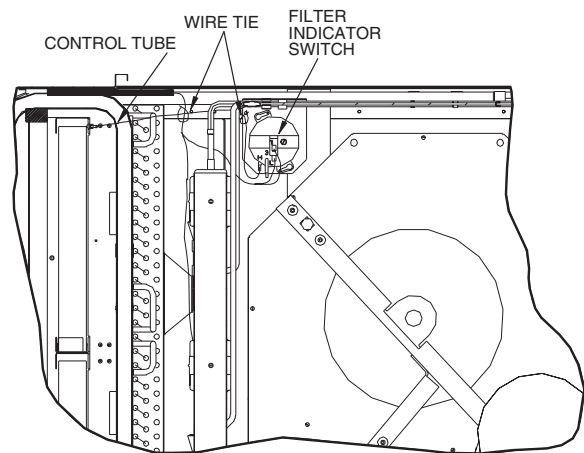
Indicator Details (48/50PG03-16 Units)
